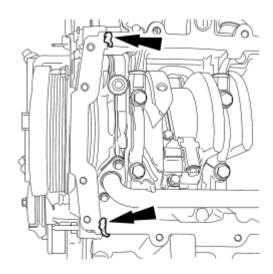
Identifying Area For Applying Bead Of Silicone Gasket And Sealant Courtesy of FORD MOTOR CO.
